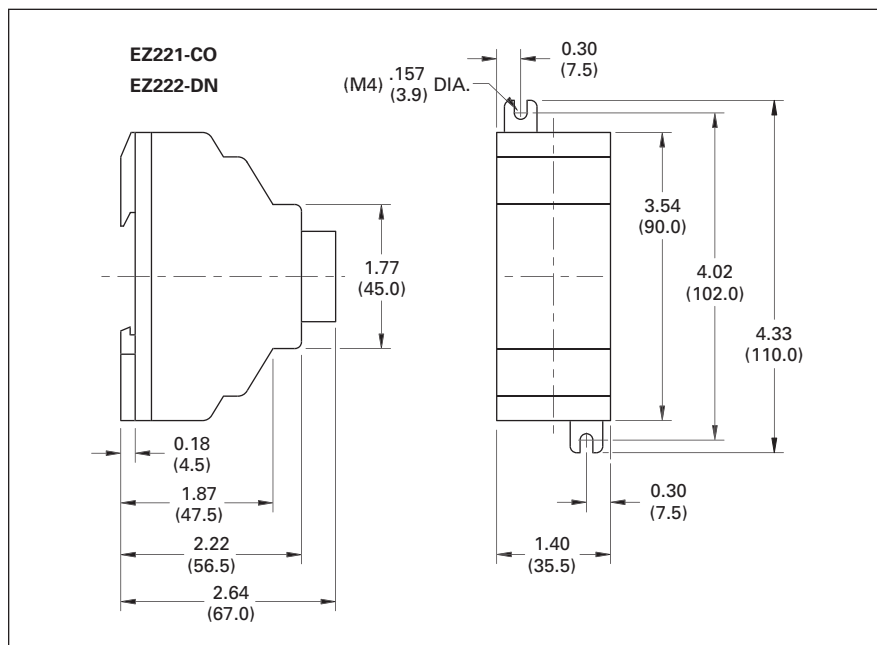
EZ221-CO/EZ222-DN Series Dimensions in Inches (mm), Drawing Number MD05013010E
